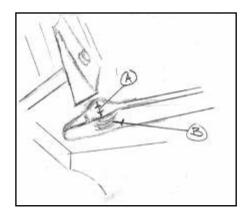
Lay flat on anvil then flatten swells out back to the 1/4" thickness. This will generate the radius for the top of the head.
